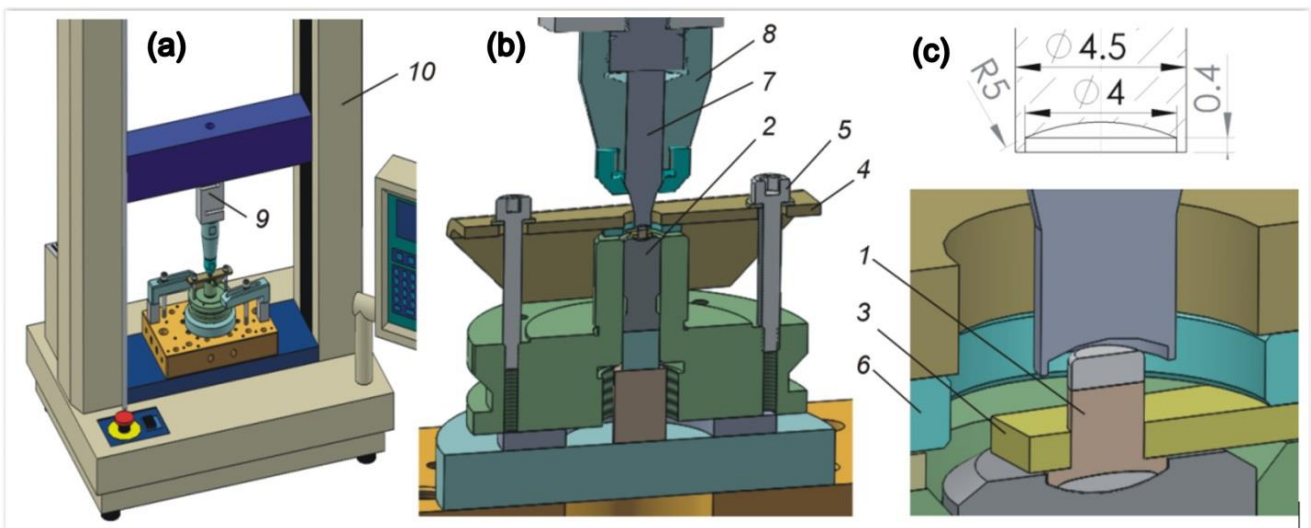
Experimental set-up (description in the text); a) the two-side connector after assembling, b) the process diagram with all components, c) the dimensions of the punch cavity and the die.
